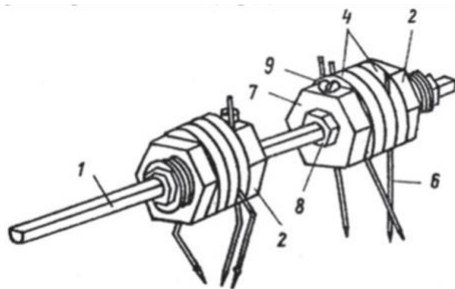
Threaded rod (1), nuts (2) and wire-fixation unit. Composed of slotted washers (4) and space washer (4), bolt (9) with an axial hole and perpendicular threaded hole in its head, locking screw (9), fixation nut (8).
